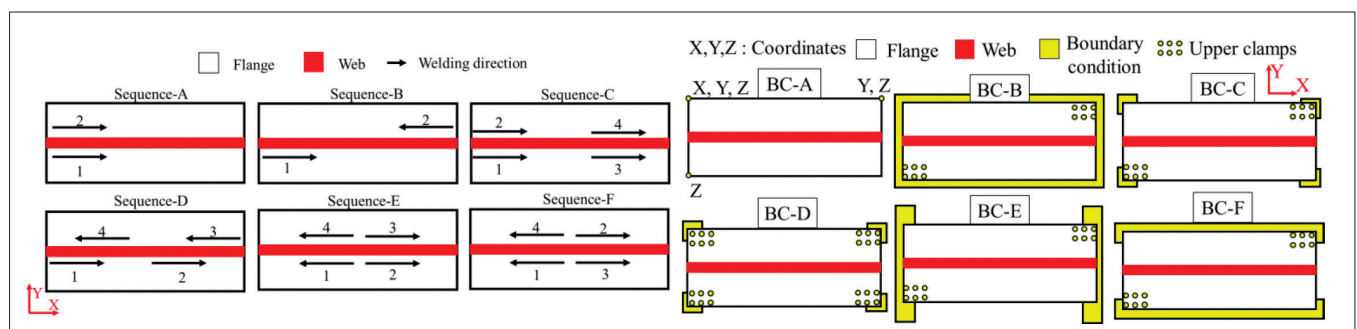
Welding sequence and mechanical boundary conditions
